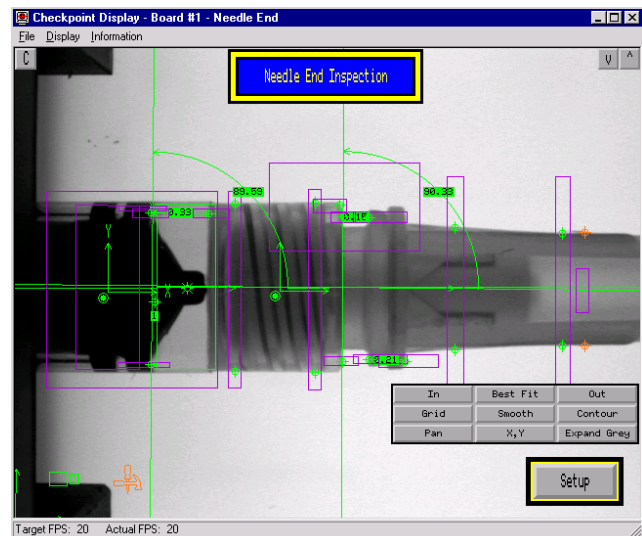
Sample Image of Needle End Vision Inspection Tools
